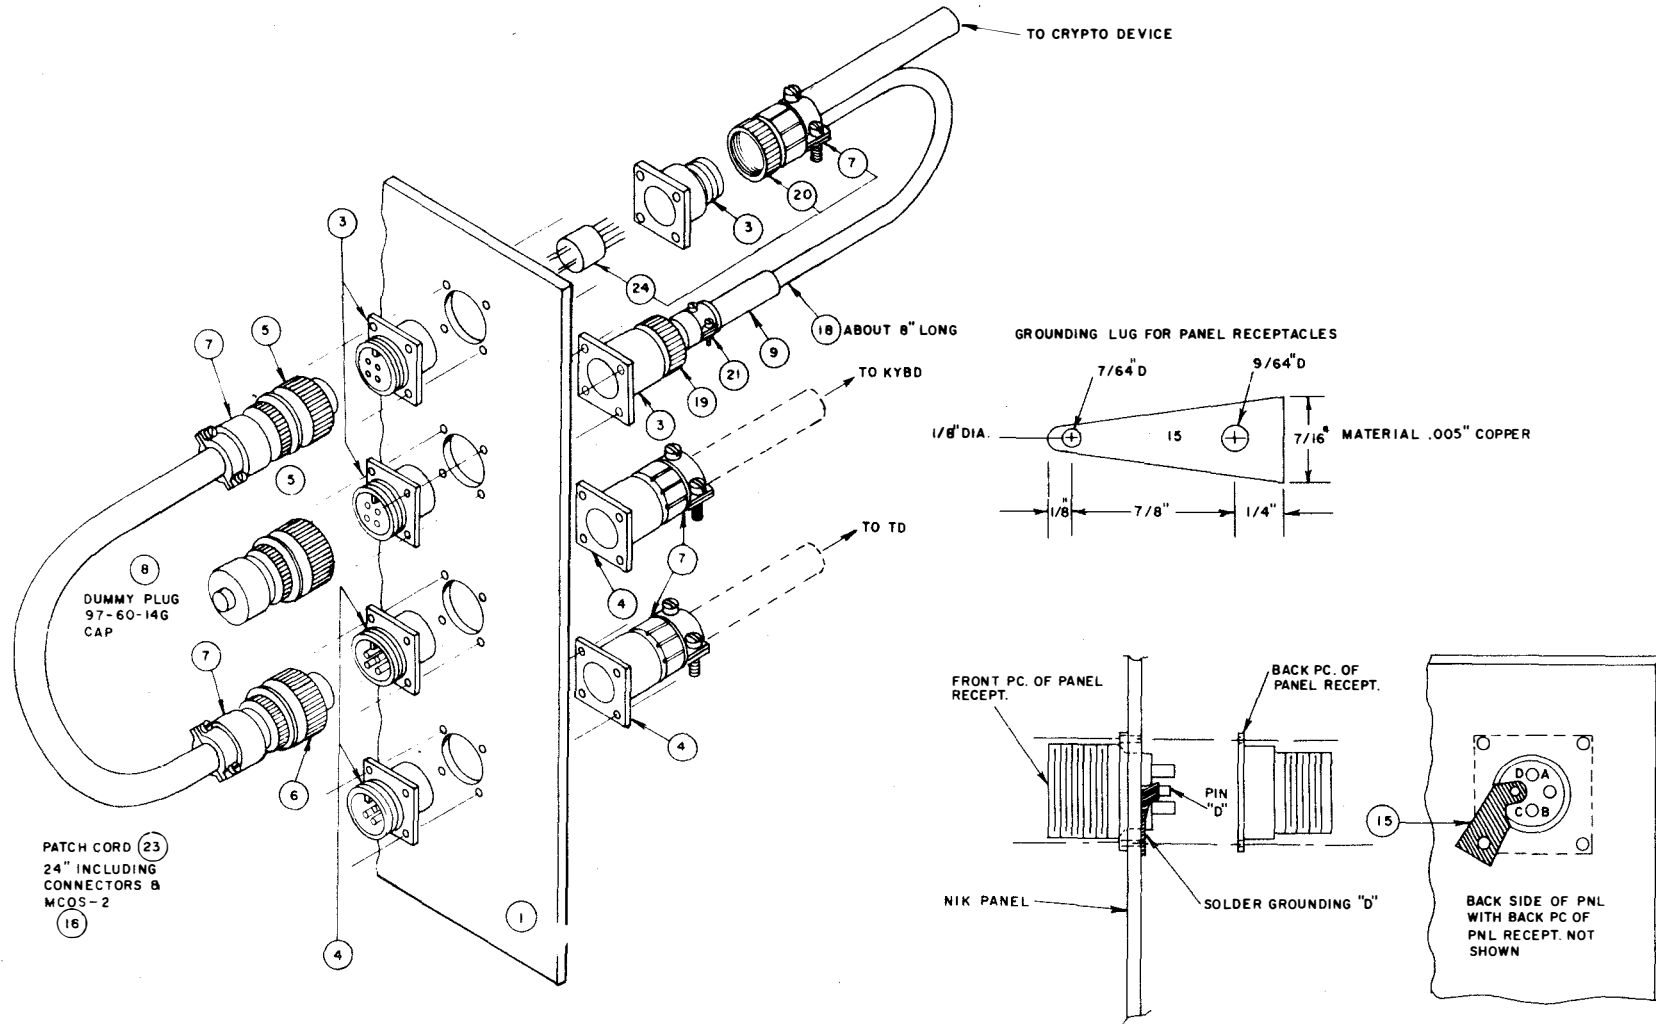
SB-3176/UGQ Installation Drawing (Part 1)
